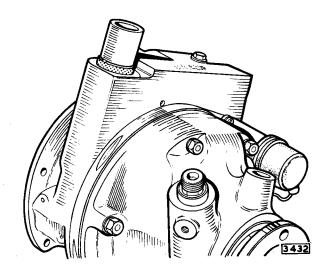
Refitting the accumulator piston using the special tool No. L.304
